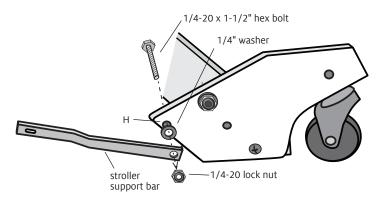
STROLLER BAR AND REAR CASTER BLOCKS
